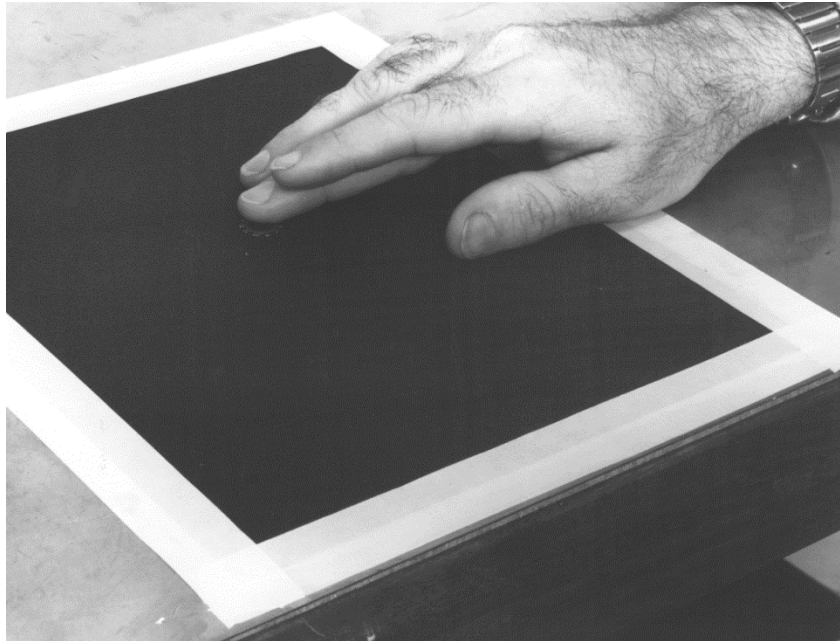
Flat Sand Deburring with Abrasive Paper Taped to Table Top
